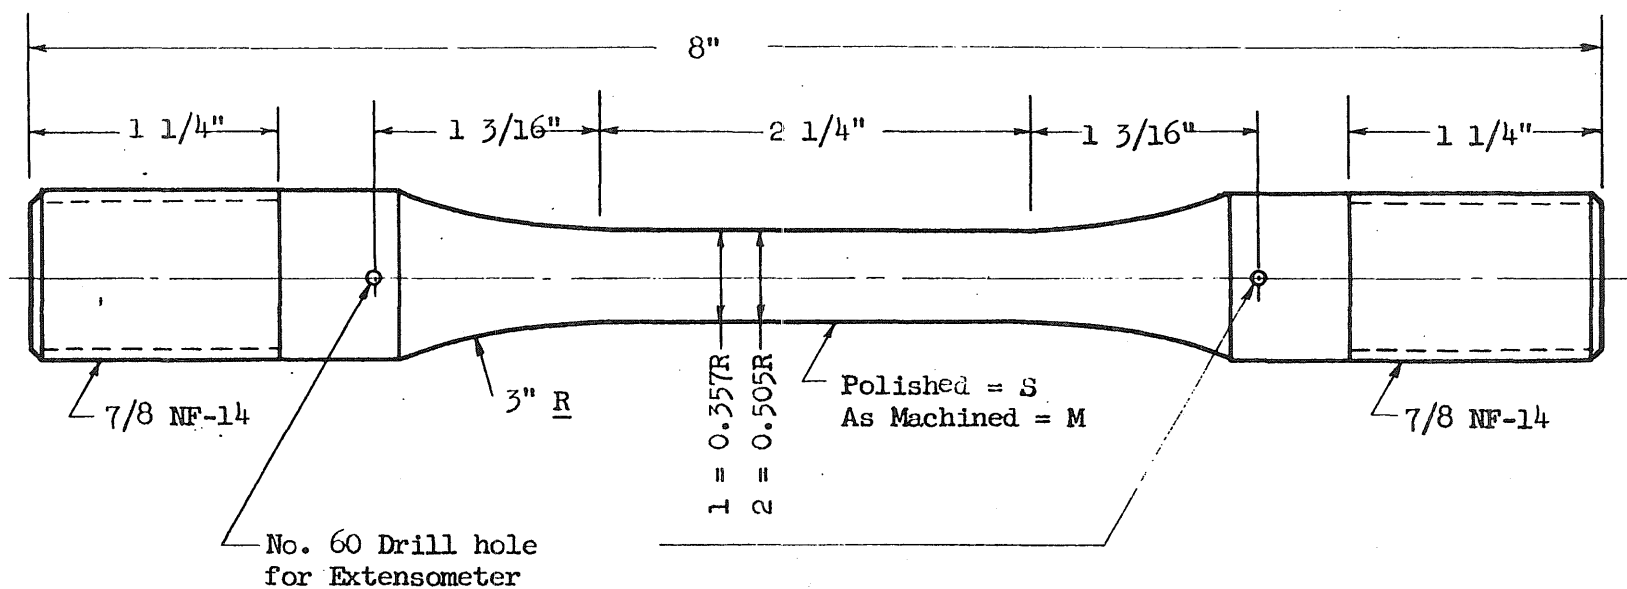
DIMENSIONS OF TENSILE SPECIMENS
